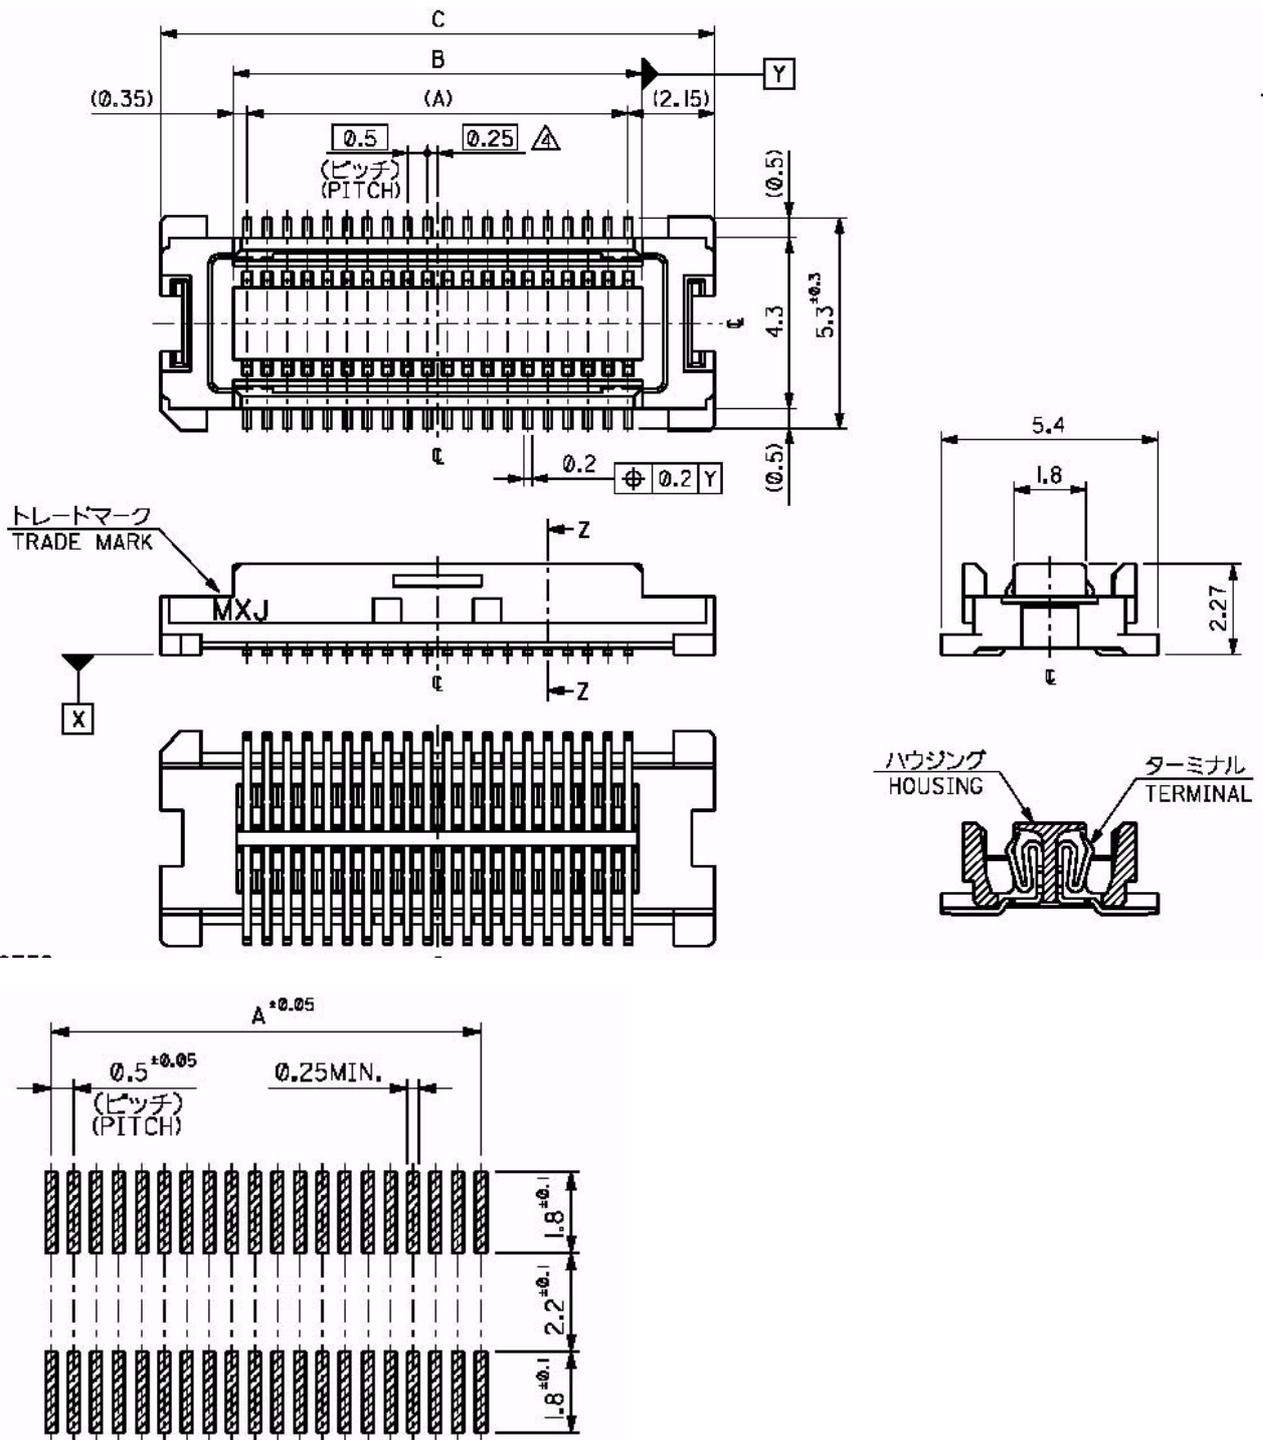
Molex board-to-board connector 52991-0808 on XT65/XT75
